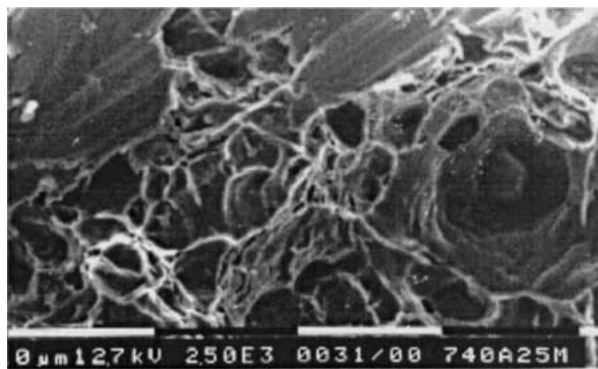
Fracture surface with ductile dimples and cleavage facets in 740A25.
